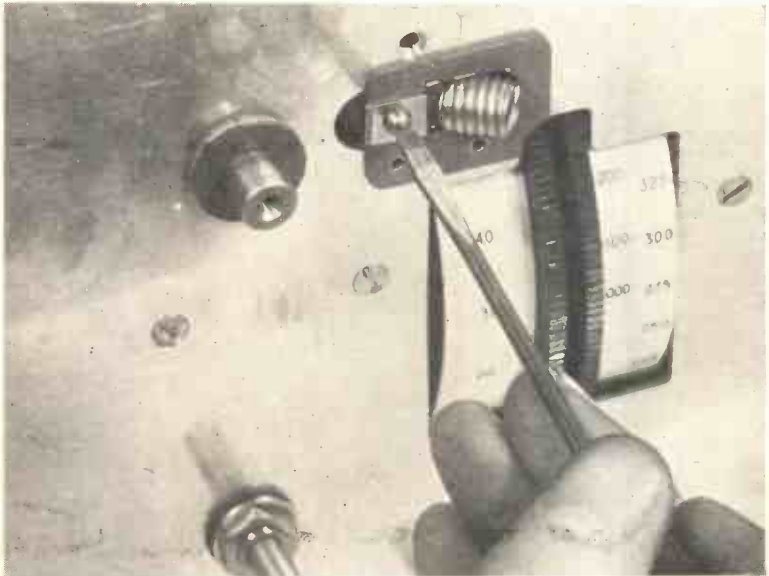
RELEASING THE PILOT HOLDER AND FRONT SCREWS OF THE COLUMBIA 307 AND 310 RECEIVERS.
